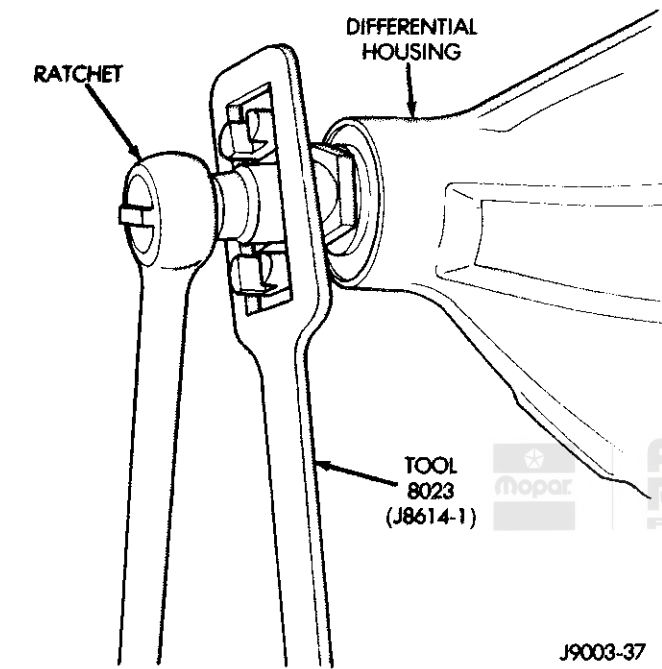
Drive Pinion Gear Shaft Nut Removal
